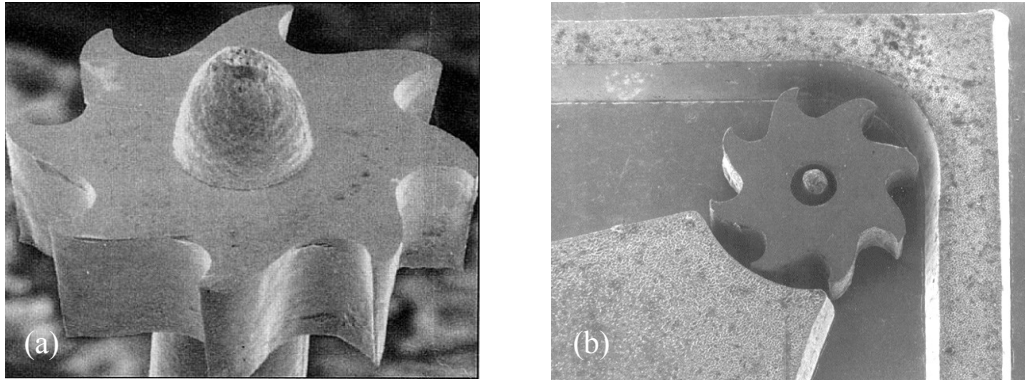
(a) Nickel rotor turbine and (b) Assembled micro-turbine prototype with turbine installed [61].
